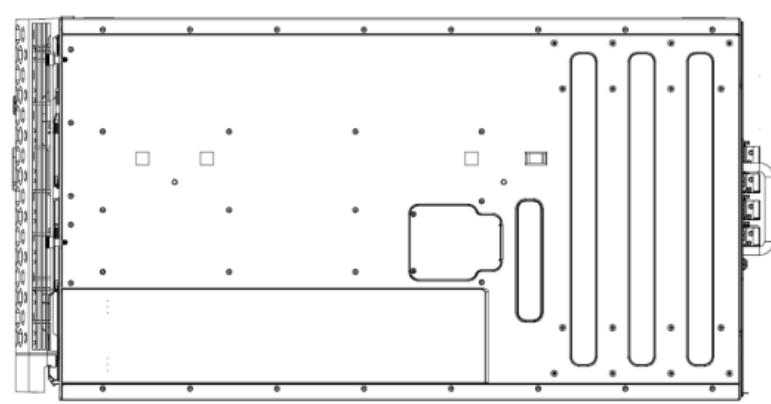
PRIMEQUEST 2400E/2800E right side view
